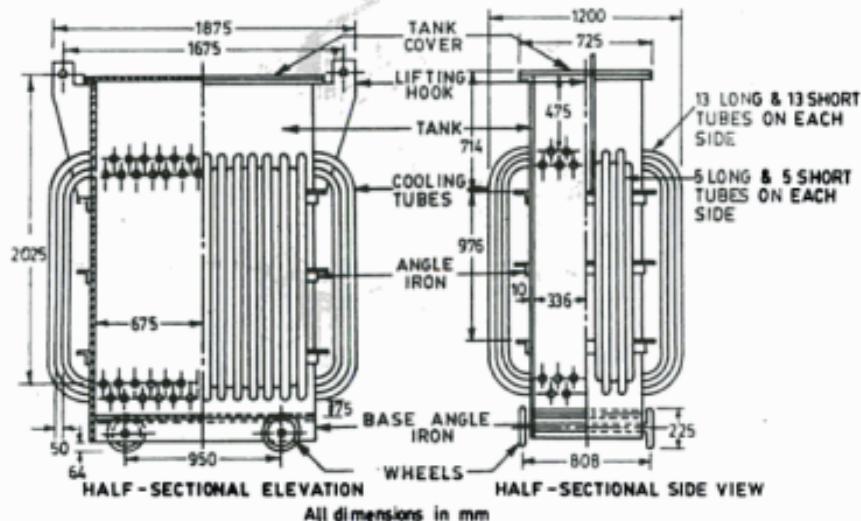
Transformer oil tank. (a) Half-sectional elevation; (b) Half-sectional side view
